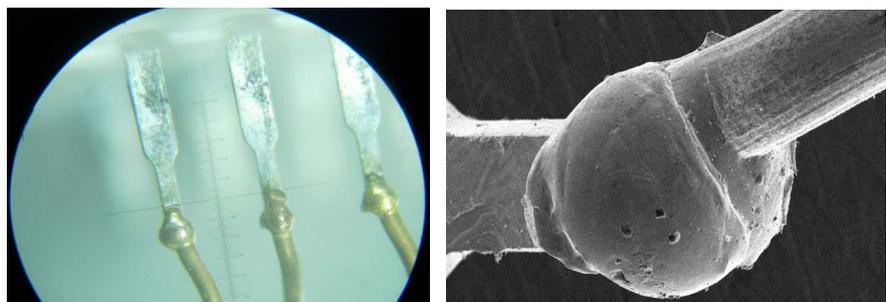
Left: Macro photograph of laser welding (40 \times). Right: Scanning electron microscope image of welding spot (500 \times).
